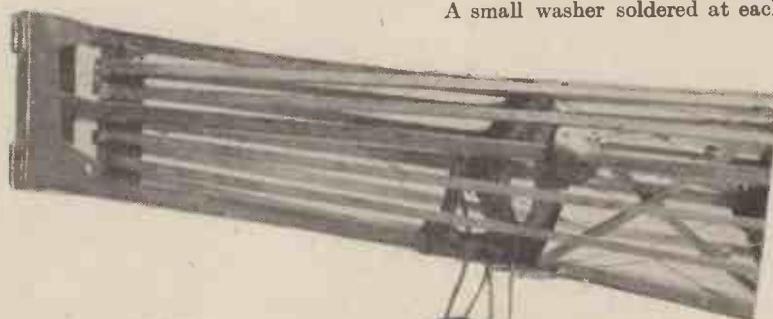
The rear chassis and sternpost socket. The latter is shown in Fig. 18.
